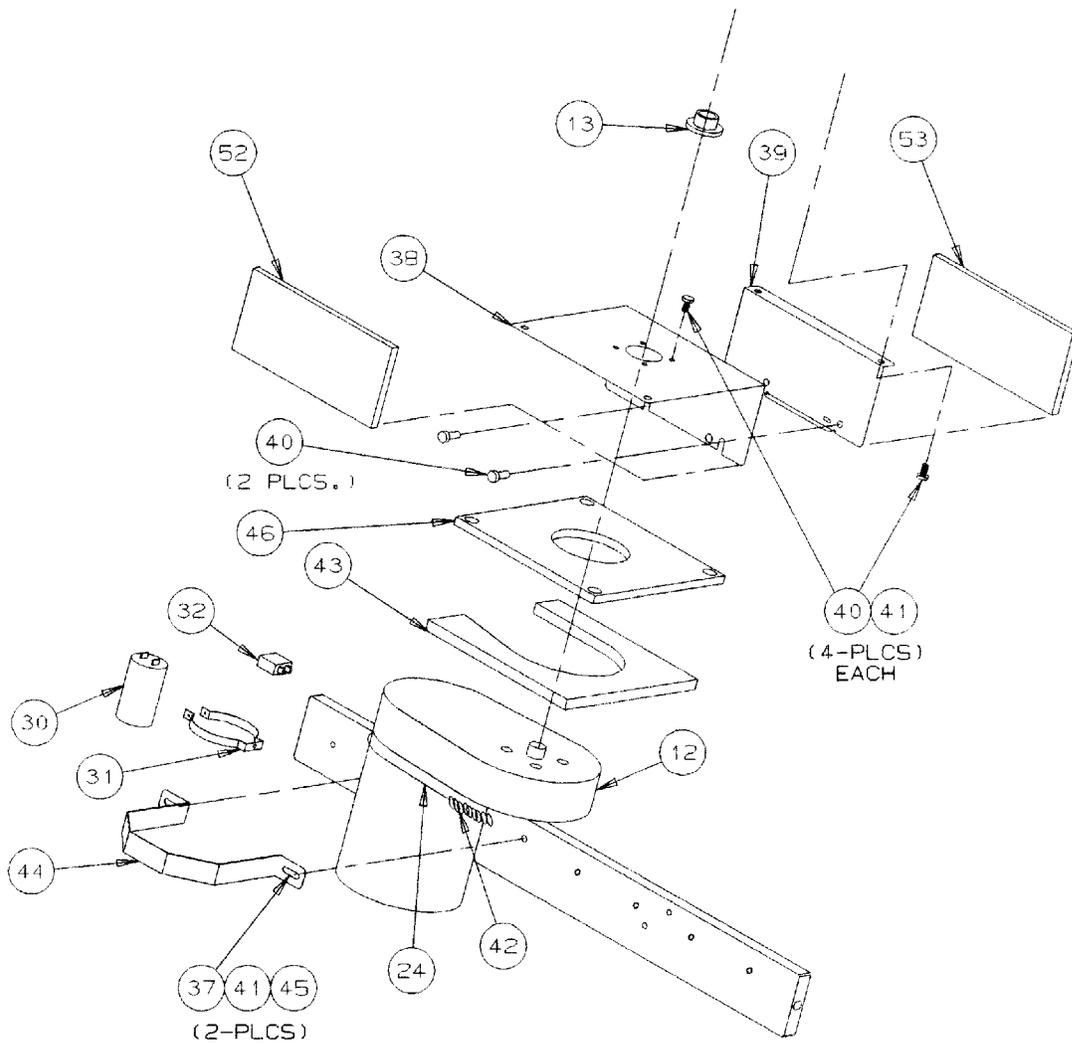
MOTOR ASSEMBLY DETAIL AND PARTS LIST
